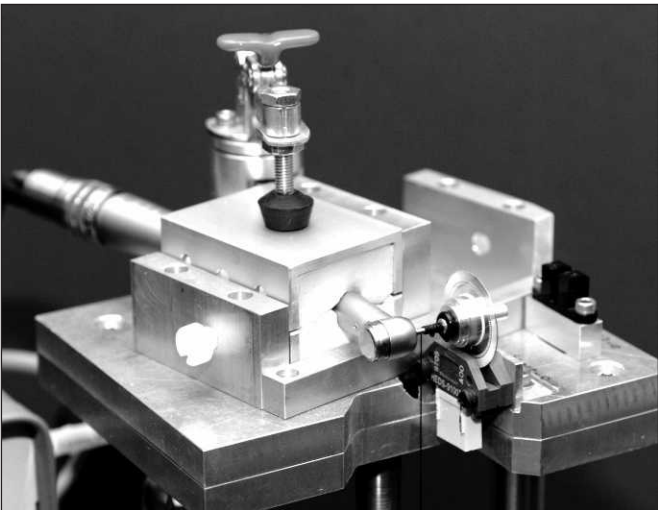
View of a handpiece mounted in the torque and bearing resistance test station, with the position-sensor sector disk in place.
